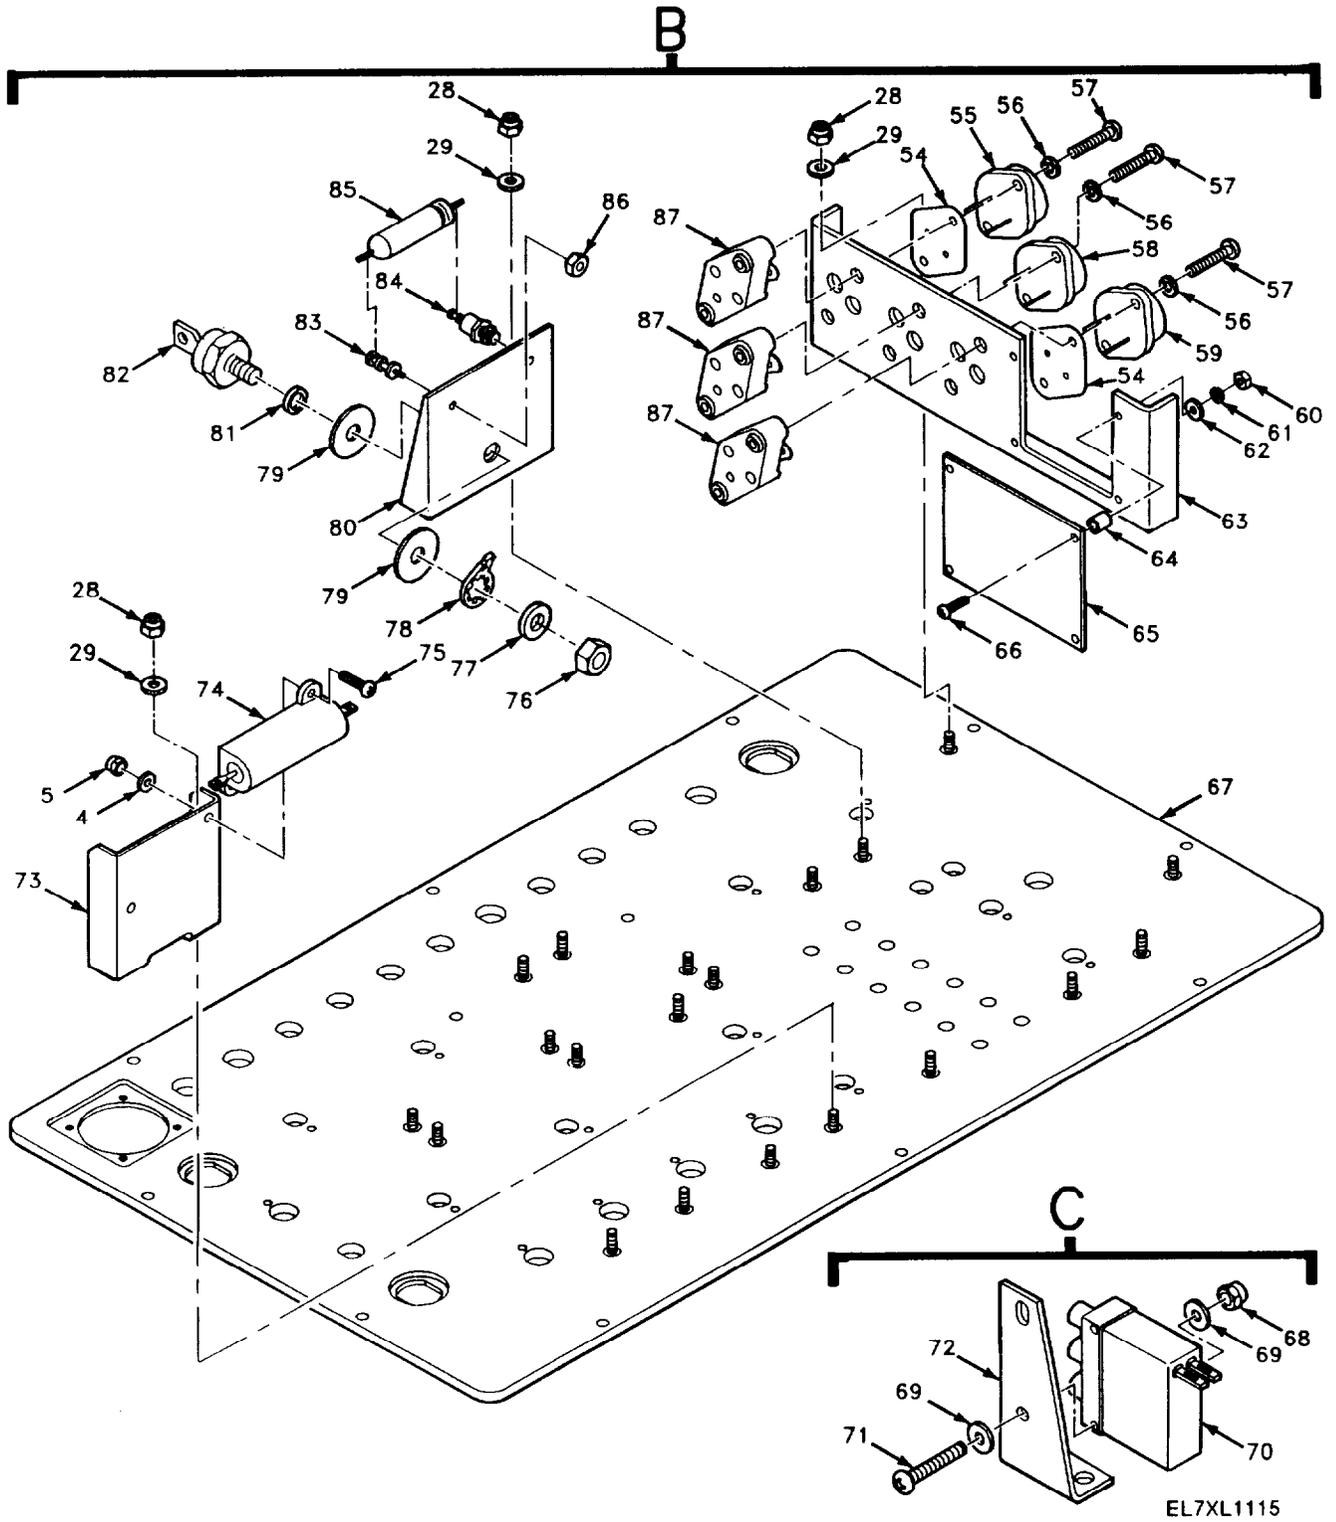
Test Adapter Front Panel Repair. (Sheet 3 of 3)
